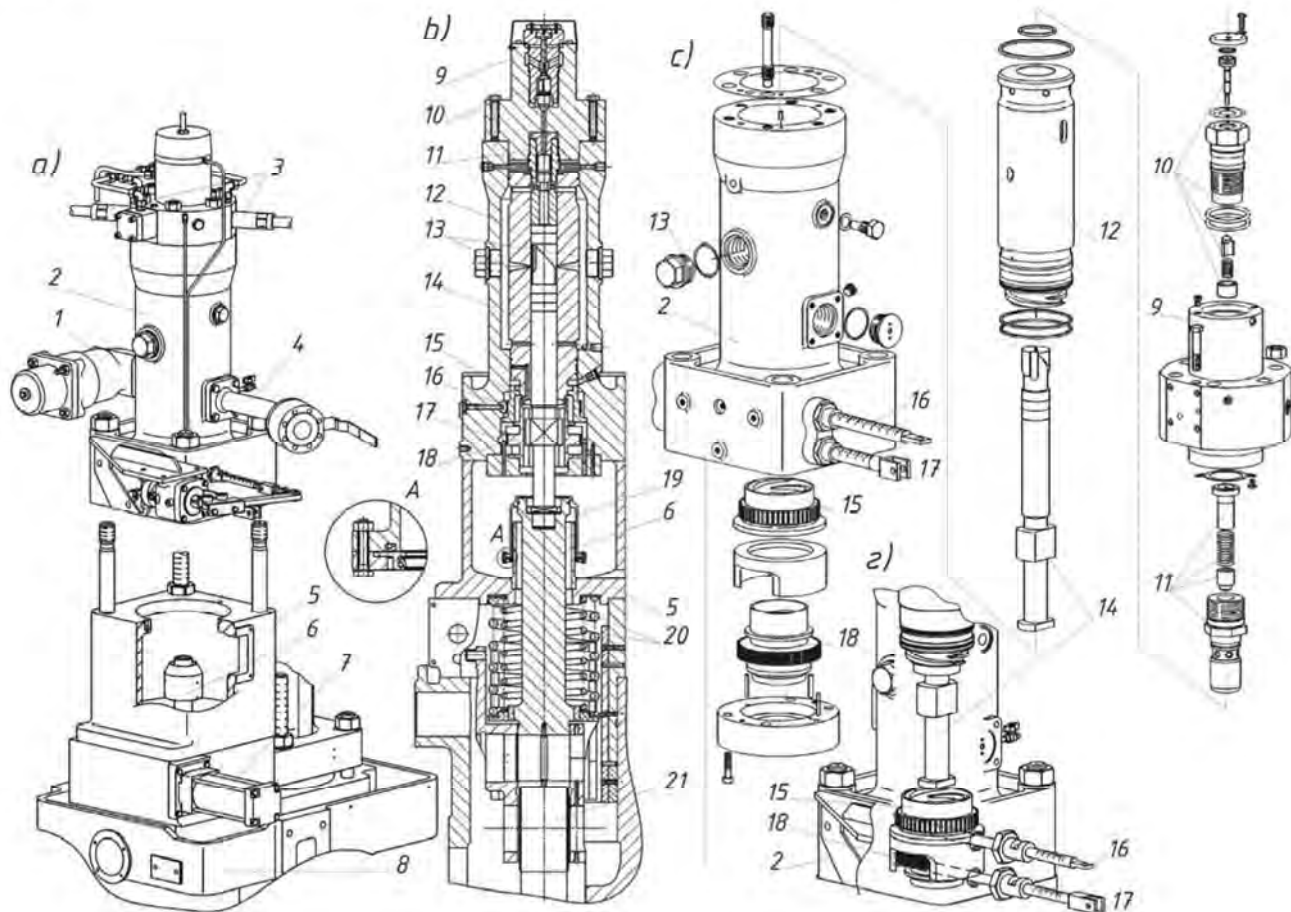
Fuel pump of a low-speed engine of the MC series from MAN with spool control of cyclic supply and fuel injection advance angle (VIT system): 1 – spring pressure damper; 2 – fuel injection pump housing; 3 – high pressure tubes; 4 – fuel supply pipe to the pump; 5 – pusher housing; 6 – pusher; 7 – pneumatic cylinder for driving the reversing mechanism; 8 – camshaft housing; 9 – pump cover; 10 – bypass valve; 11 – suction valve from the upper guide of the plunger bushing; 12 – plunger bushing; 13 – replaceable plugs; 14 – plunger; 15 – rotary sleeve for adjusting the supply advance; 16 – gear rack for adjusting the supply advance angle; 17 – toothed rack for adjusting the cyclic fuel supply; 18 – plunger reversal sleeve; 19 – sliding cuff of the pusher; 20 – return springs; 21 – pusher roller (adapted from [17, 22])
